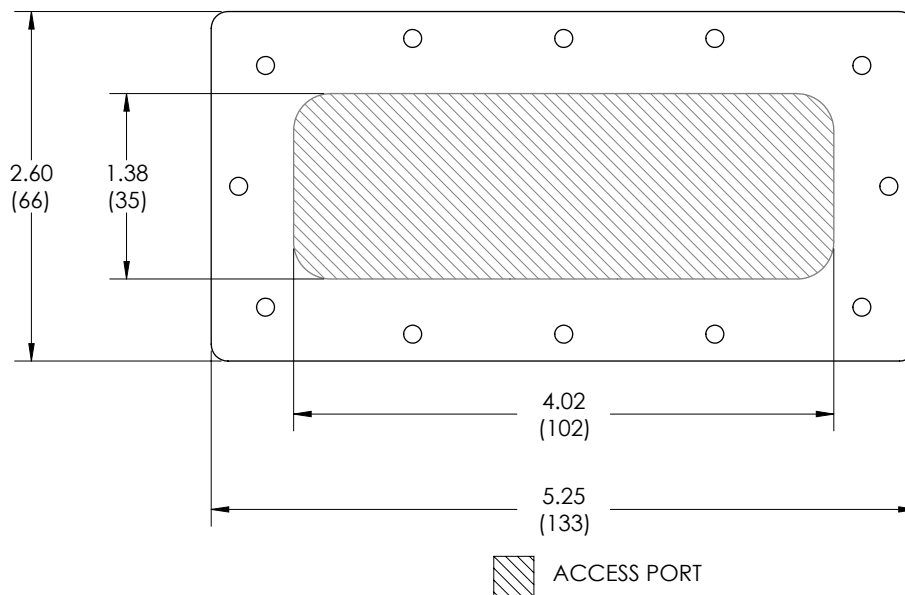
Access port dimensions. O-ring lies between shaded area and bolt holes.
